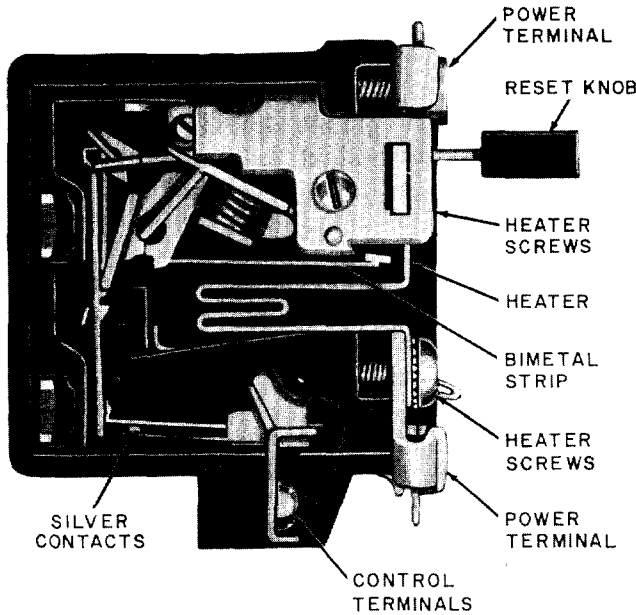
Typical CR2824-42 Type Overload Relay with Cover Removed and Heater Mounted
